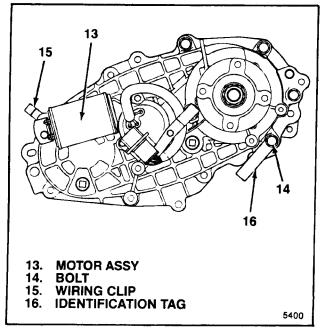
Wiring Clip, Identification Tag and Motor Locations
